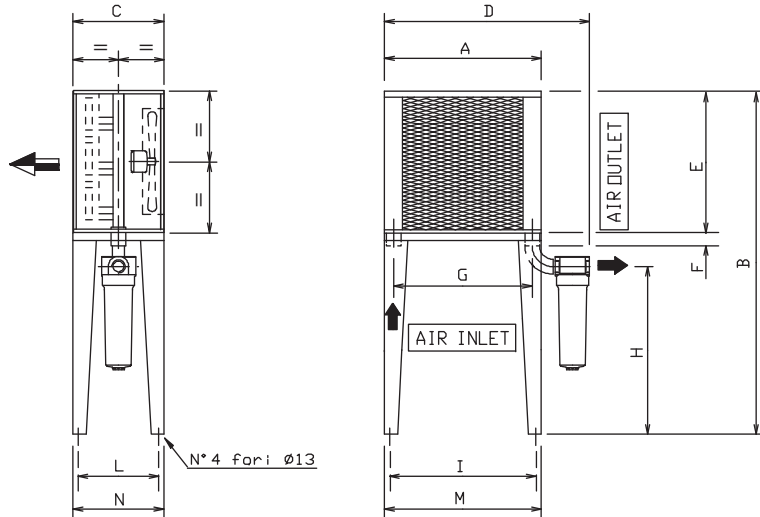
Overall dimensions Aftercooler + Separator STH/SFH
